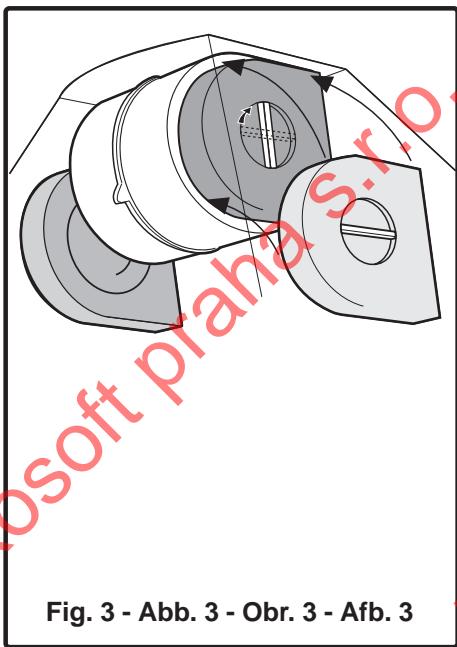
Abb. 3 - Obr. 3 - Afb. 3
